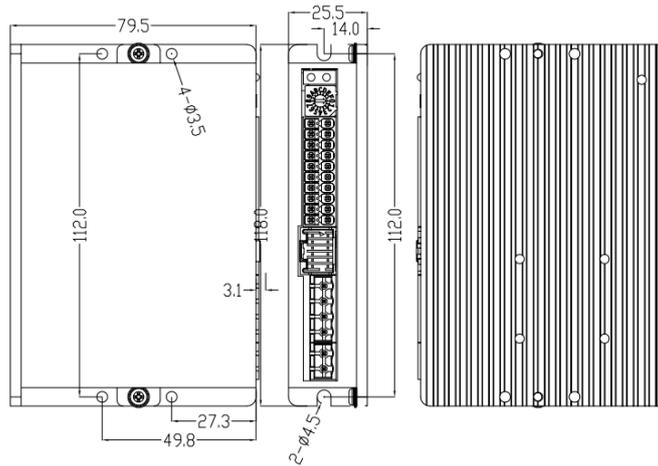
(A) installation method of drive ELD2-CAN7005B /ELD2-CAN7010B
